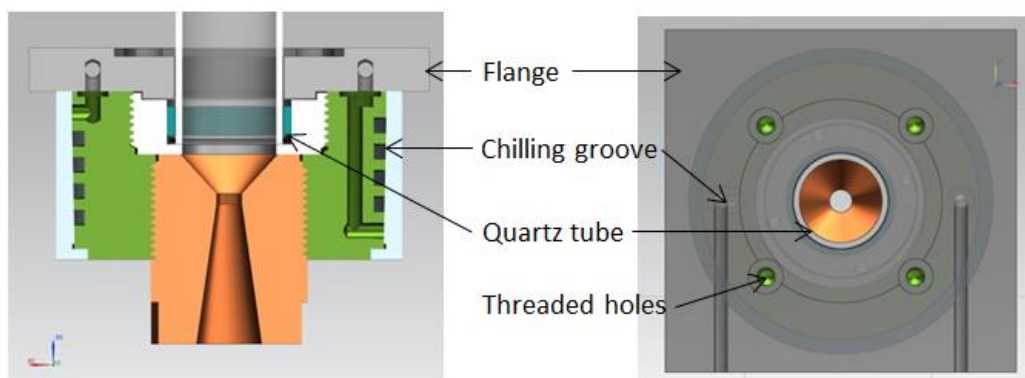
Assembly diagrams of the new nozzle and existing flange. Left: section view; Right: top view
